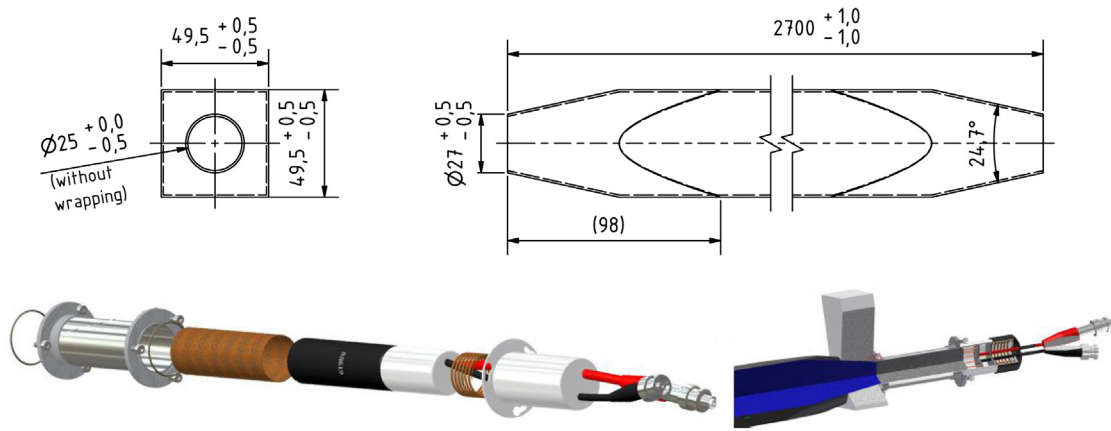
Technical drawing of a NeuLAND submodule (scintillator bar) together with its light guides in the upper part, and a schematic of a PMT and its holding structure in the lower part. In detail, the individual components of the PMT holding structure are shown in the lower left. Those are from left to right: O-ring, guiding-tube, O-ring, μ -metal, PMT, base, spring, bayonet lock. Note, the μ -metal has been used during the R&D phase, however, it is not used in the final assembly. In the lower right the PMT is mounted to the scintillator bar. The guiding-tube of the PMT is installed at the mounting-block of the scintillator. The bayonet lock is sealed using an elastomer cap for light-tightness.
